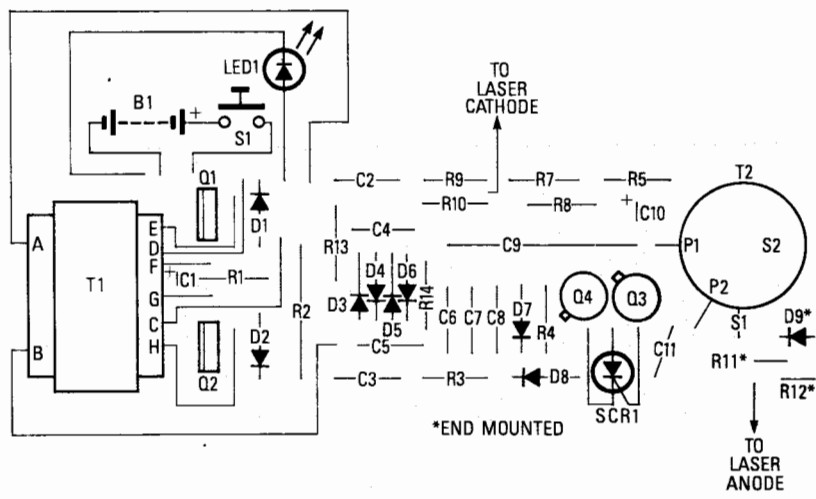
IF YOU CHOOSE to use the PC board provided in our PC Service section, use this parts-placement diagram.
